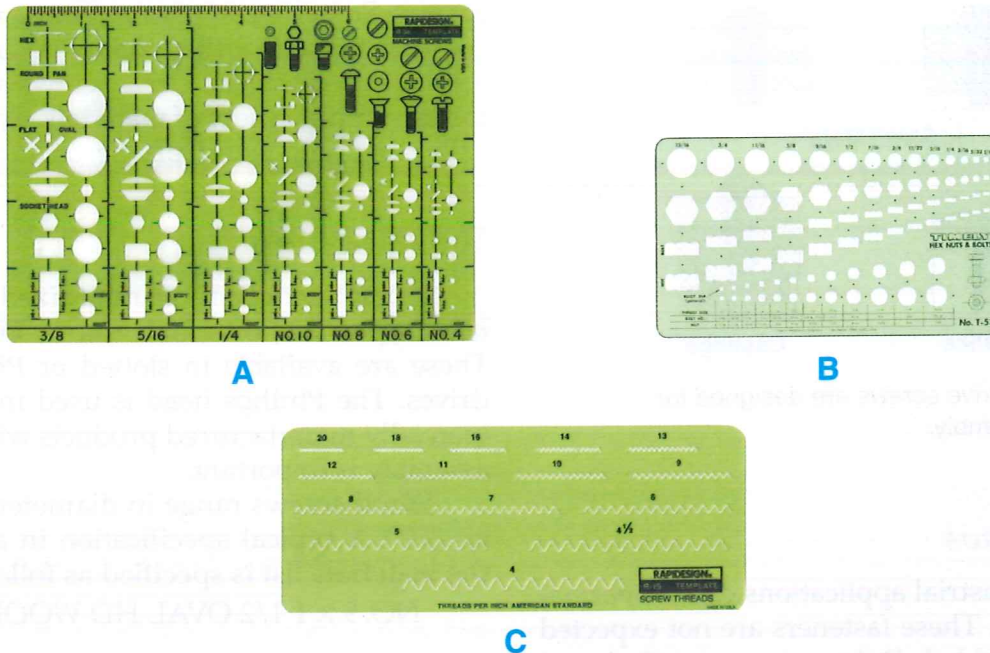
Templates should be used when available to speed the drawing of threads and fasteners. A—Drawing template for machine screws. B—Drawing template for hexagonal head fasteners. C—Drawing template for screw threads. (Alvin & Co.)
